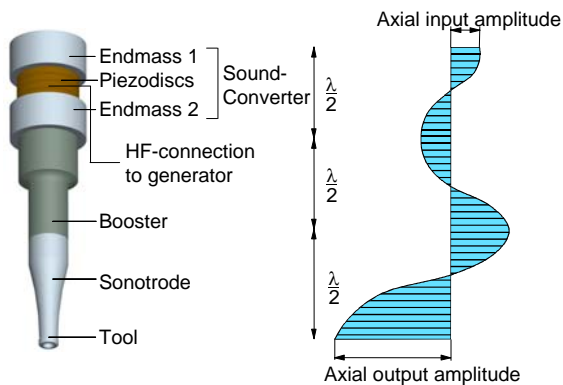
Configuration of the rotor of an ultrasonic assisted grinding spindle.
